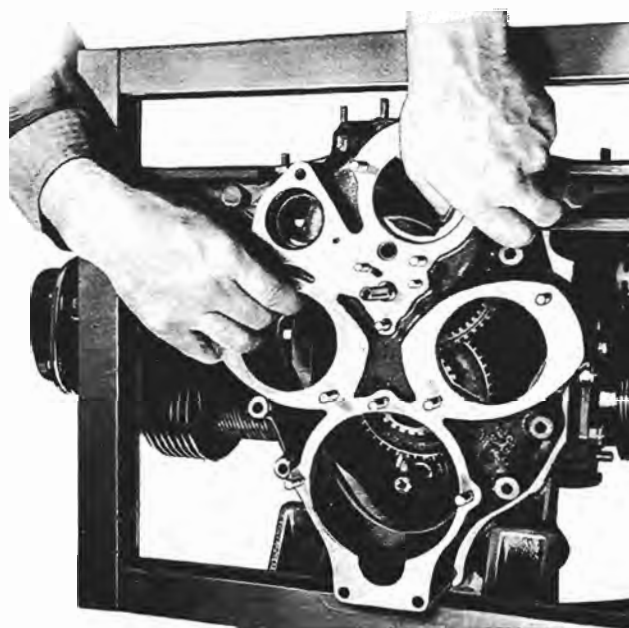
Installing Crankcase Cover on -12, -14, -16 and O-200 Models.
